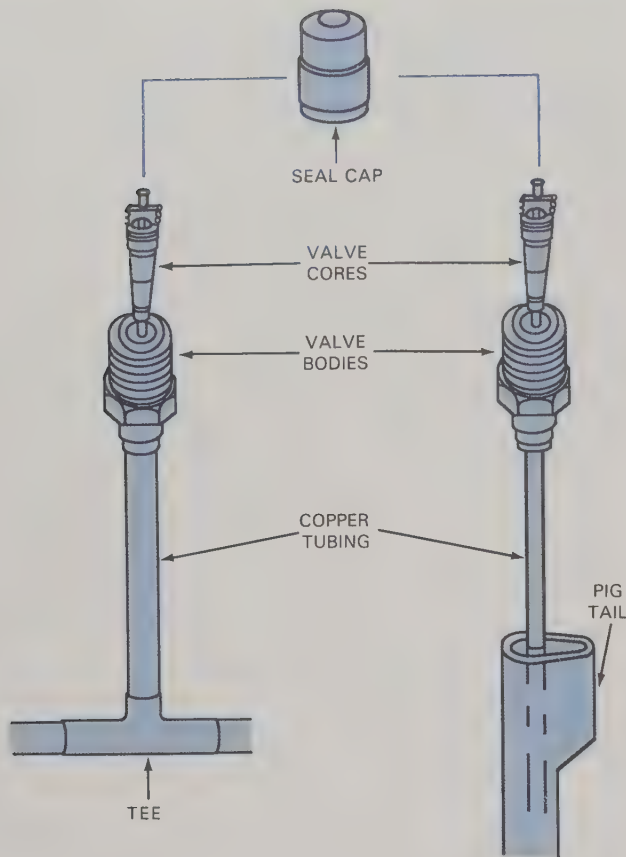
Schrader valves are installed for permanent service access to domestic systems. The cores must be removed while the valve body is brazed to the tubing, since heat would affect the gasket material.
